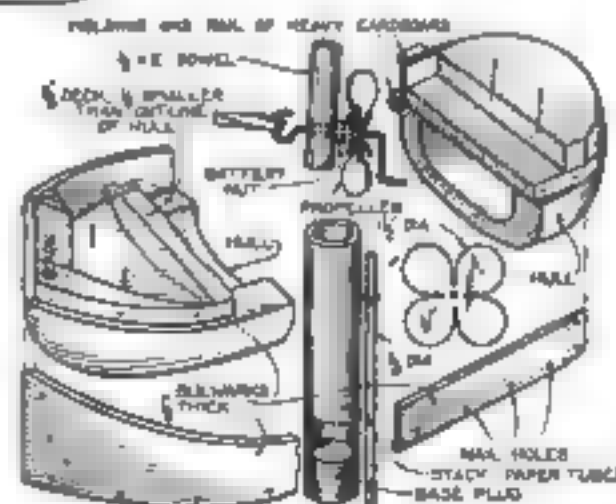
Details showing method of assembling the hull, applying the thin bulwarks, and making the propeller and smokestack.
